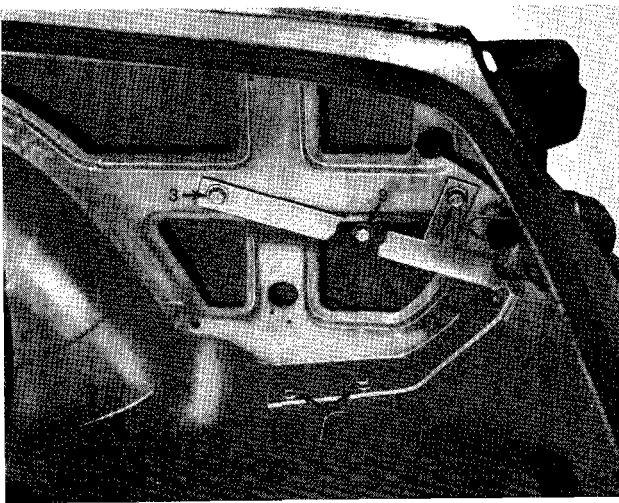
Rear bumper attachment (Spitfire Mk. 3)
